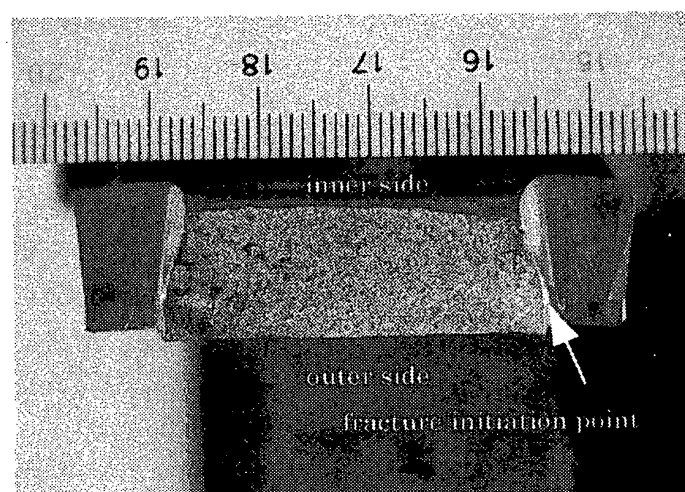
Brittle fracture surface (30N, -10°C)
